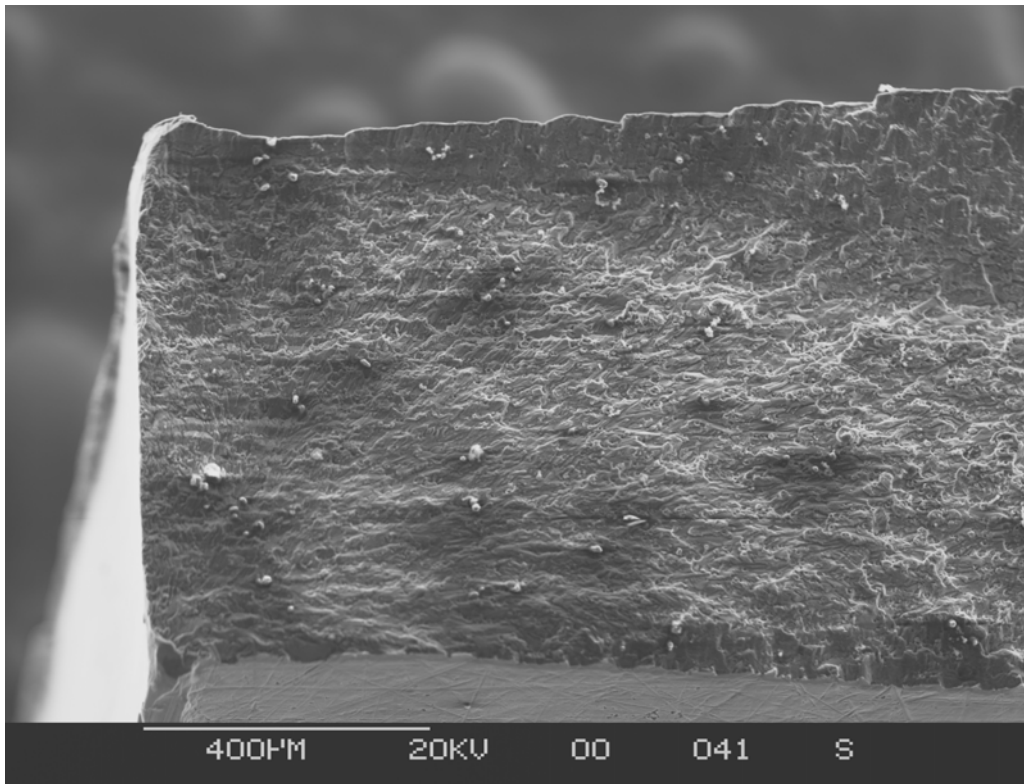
Fatigue Crack on Fracture Surface of Specimen 5872.
